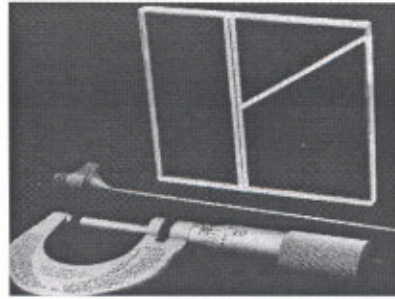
Thin tool for deep, intersecting holes through glass [1].
